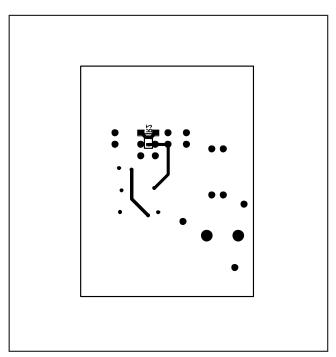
MAX4411 EV Kit Component Placement Guide—Solder Side
